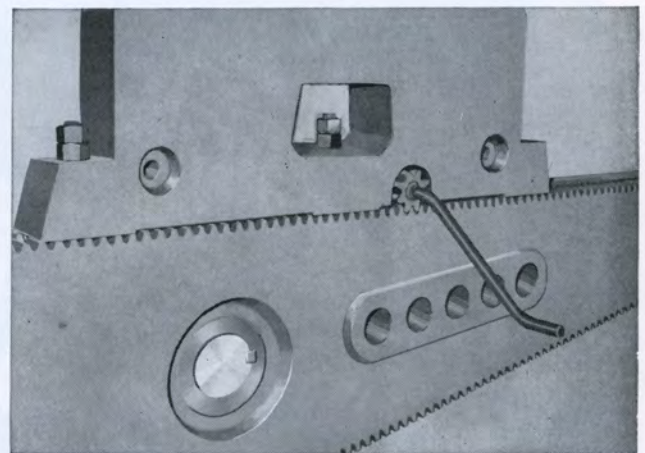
New removable pinion (with crank handle attached) is used to adjust all counterweights.
